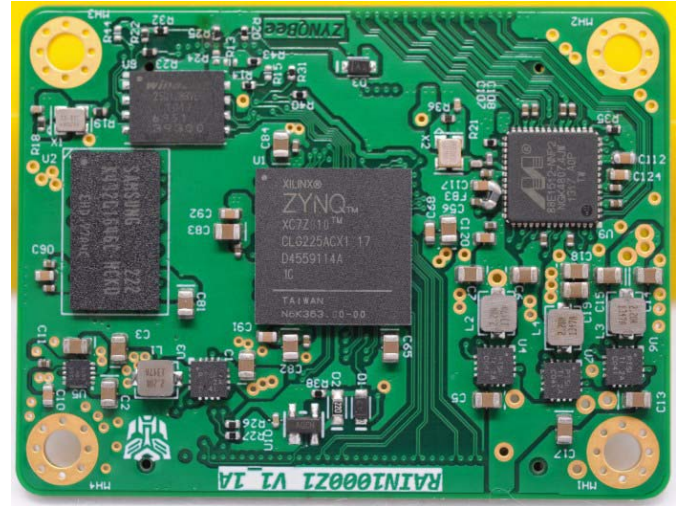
Top view of the previous RAIN1000Z1 readout module [13].
